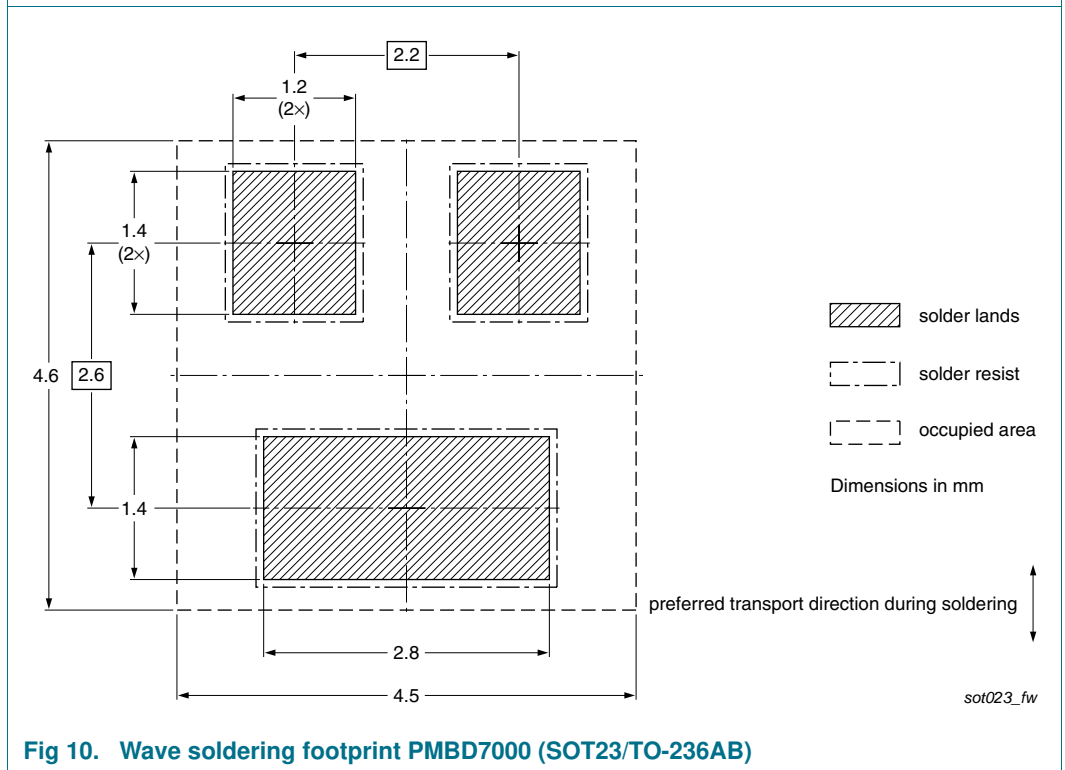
Wave soldering footprint PMBD7000 (SOT23/TO-236AB)
